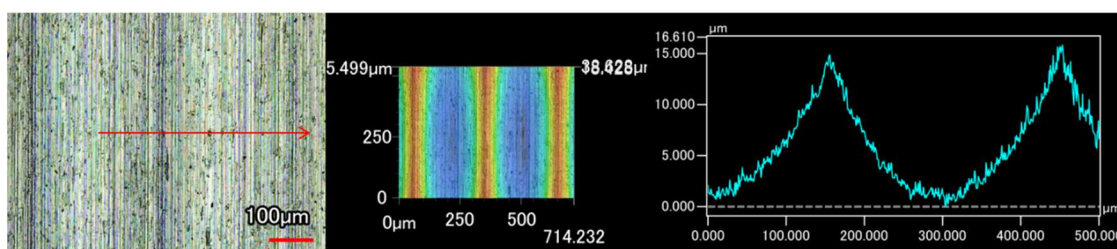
Laser microscopic image and surface roughness profiles of a grooved bearing specimen.
